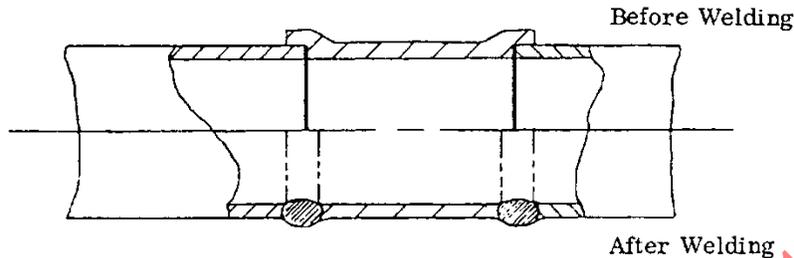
BUTT WELD WITH INSERT
